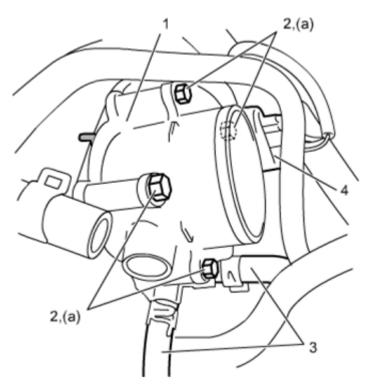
Identifying Coolant Hoses And Throttle Body Assembly Courtesy of SUZUKI OF AMERICA CORP.
